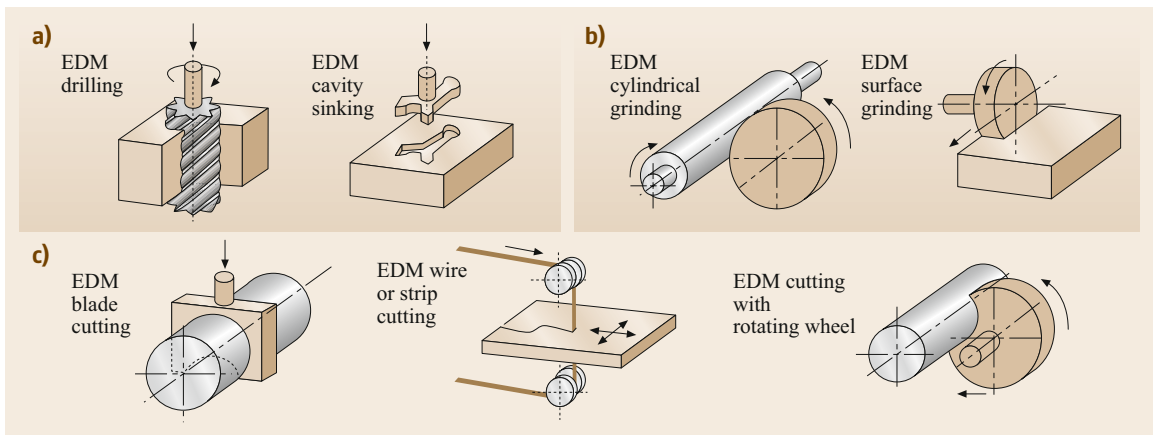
c Examples of electro-discharge machining. (a) EDM shrinking; (b) EDM grinding; (c) EDM cutting
